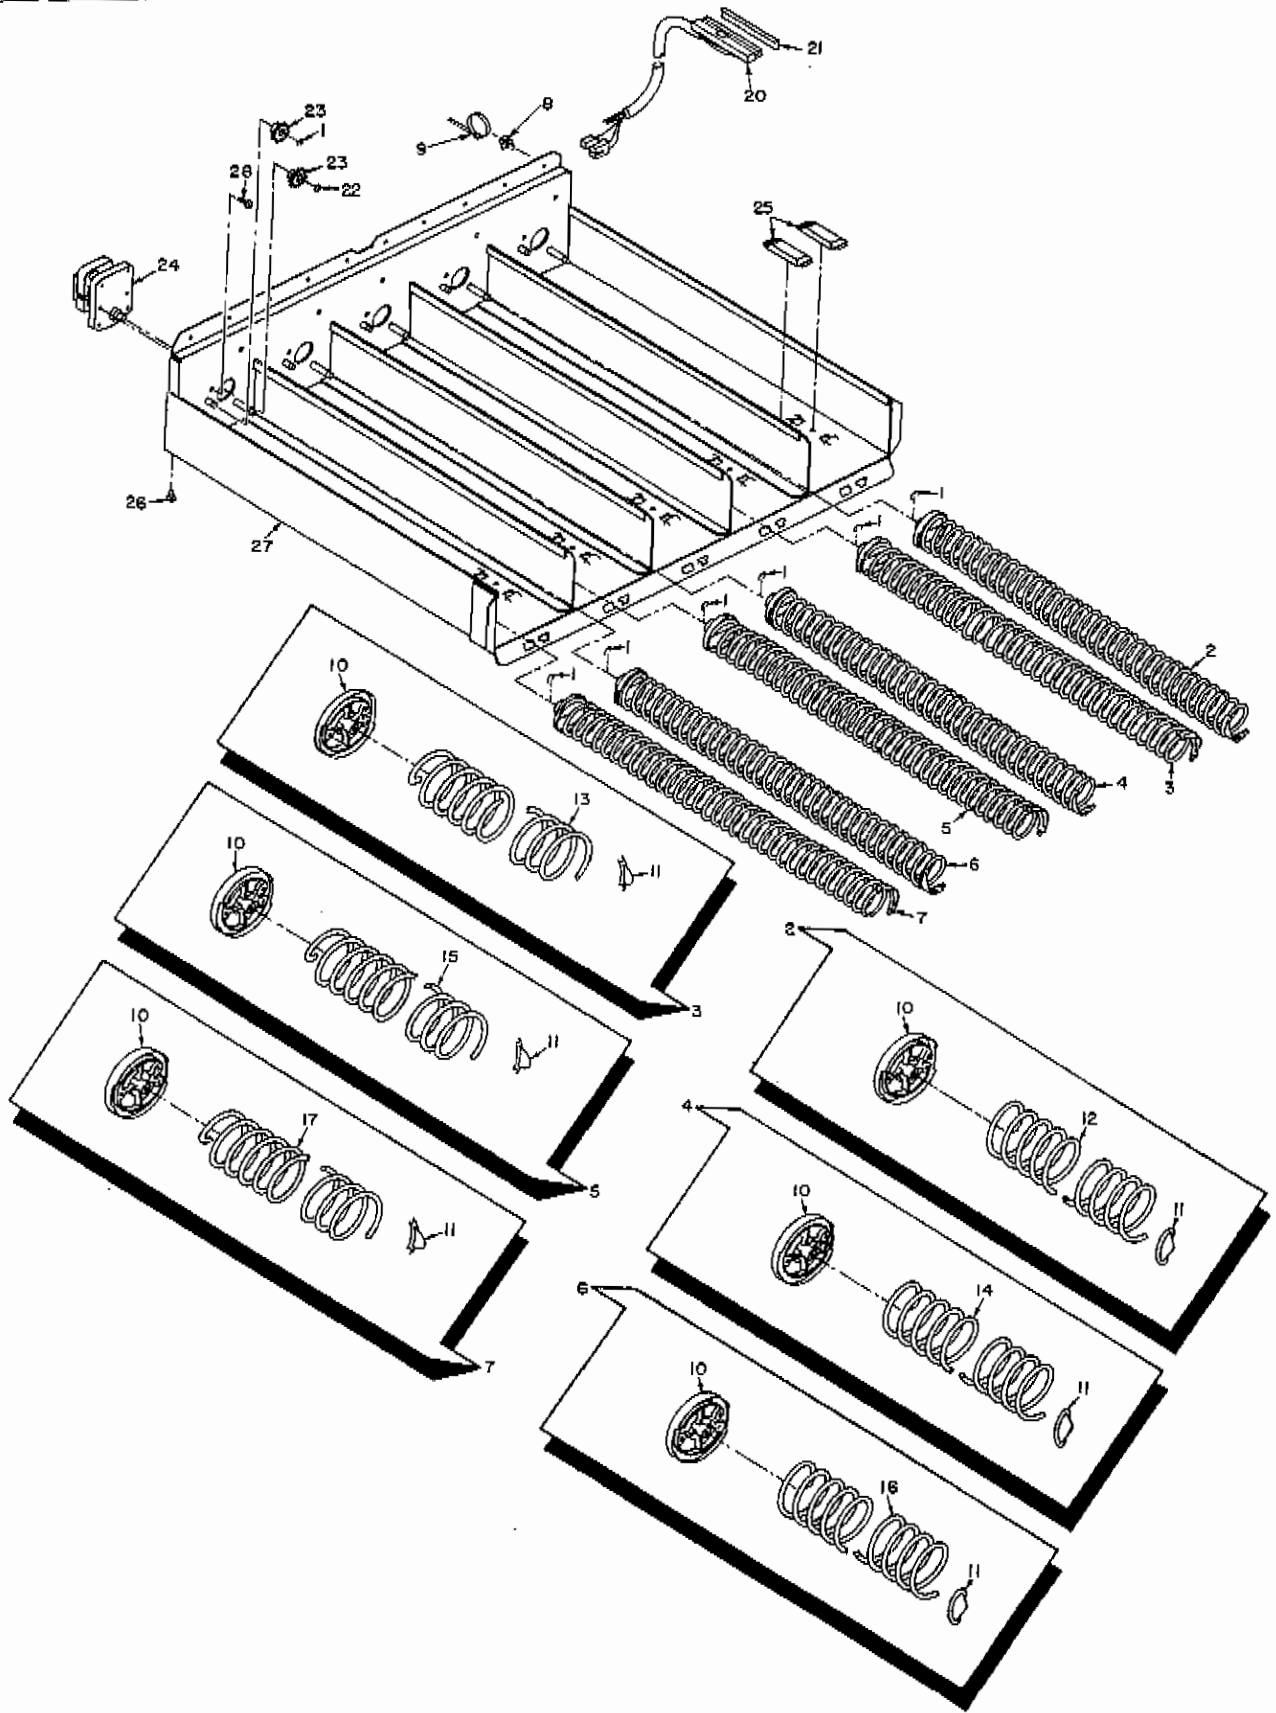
WIDE COLUMN TRAY ASSEMBLY COMPLETE
